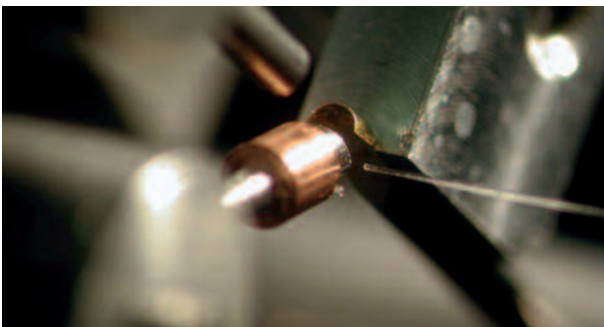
Attaching glue-tipped glass stalk to facilitate final assembly.
